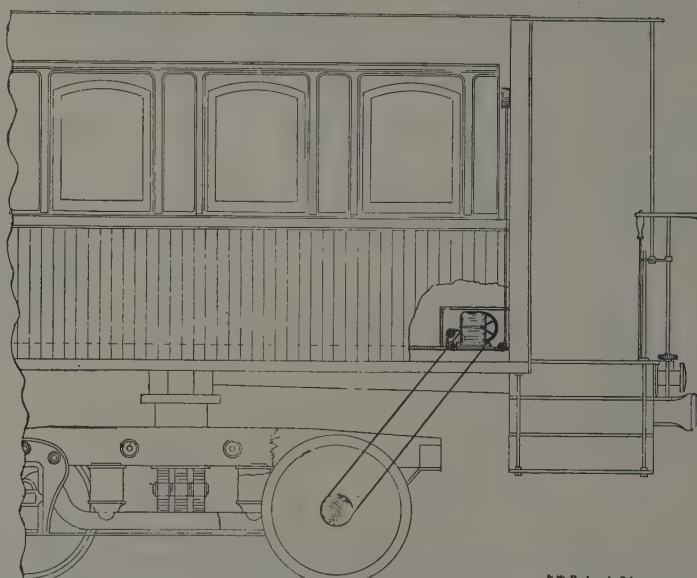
Boyer Speed Recorder Applied to Car. Chicago Pneumatic Tool Company.
